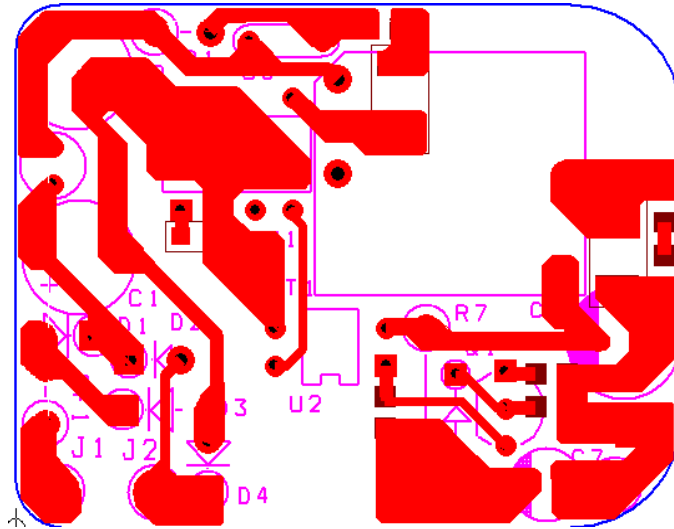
Printed Circuit Layout TOP Silk Screen and Copper Bottom Layers
